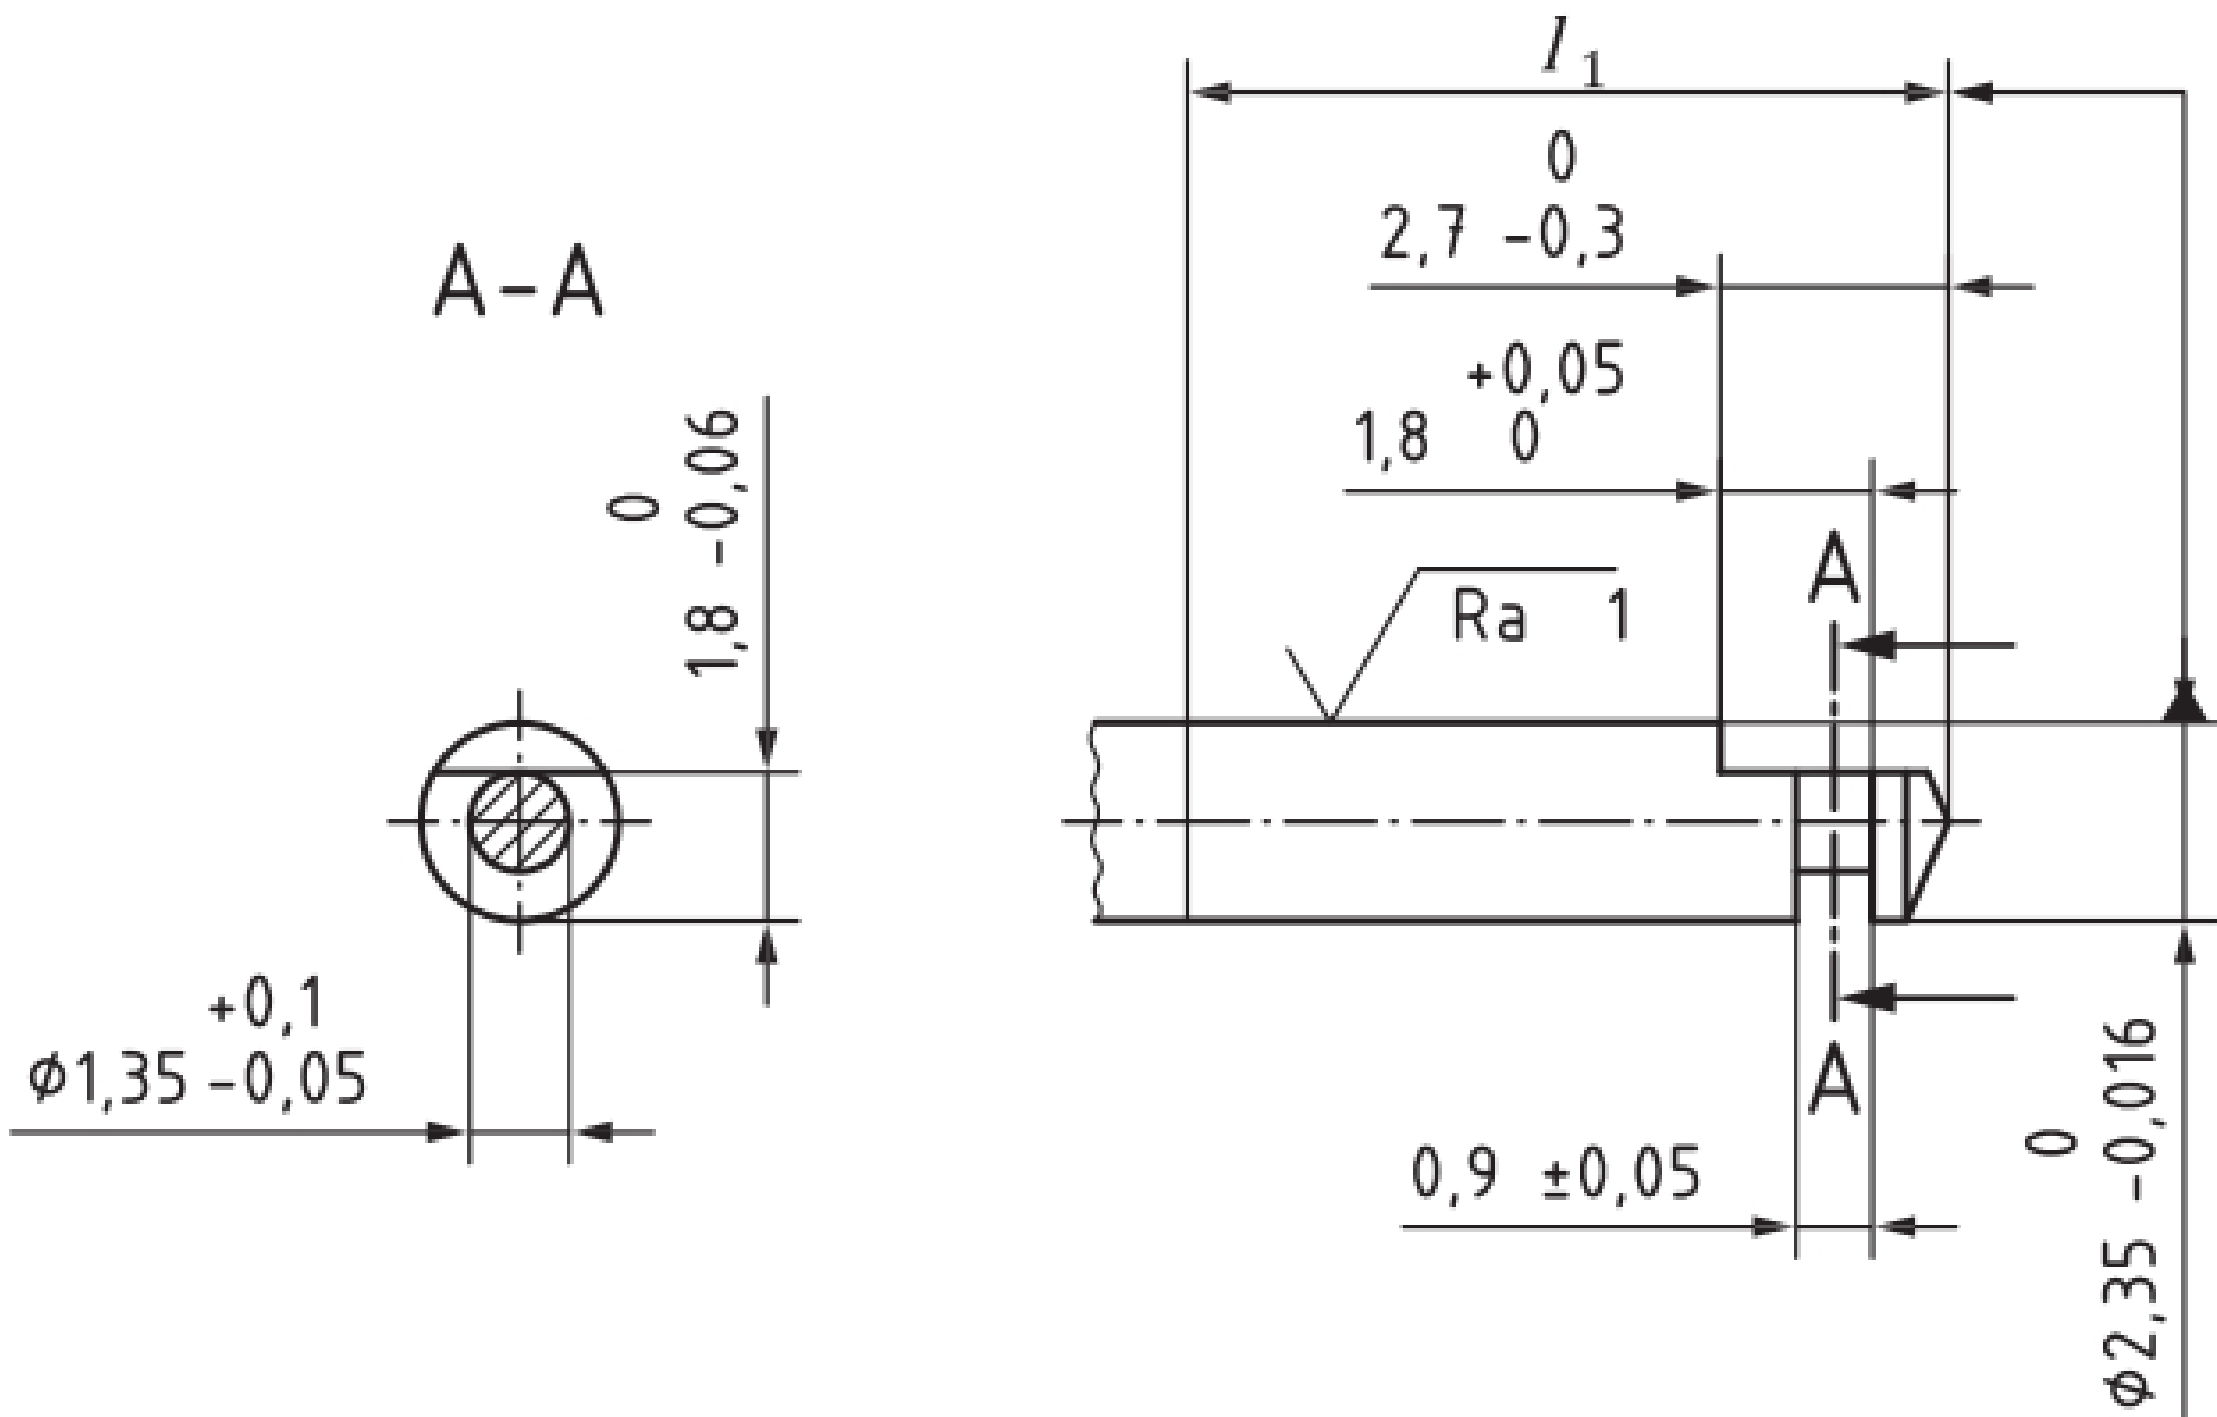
Dimensions, tolerances and surface roughness for Type 1 shank
